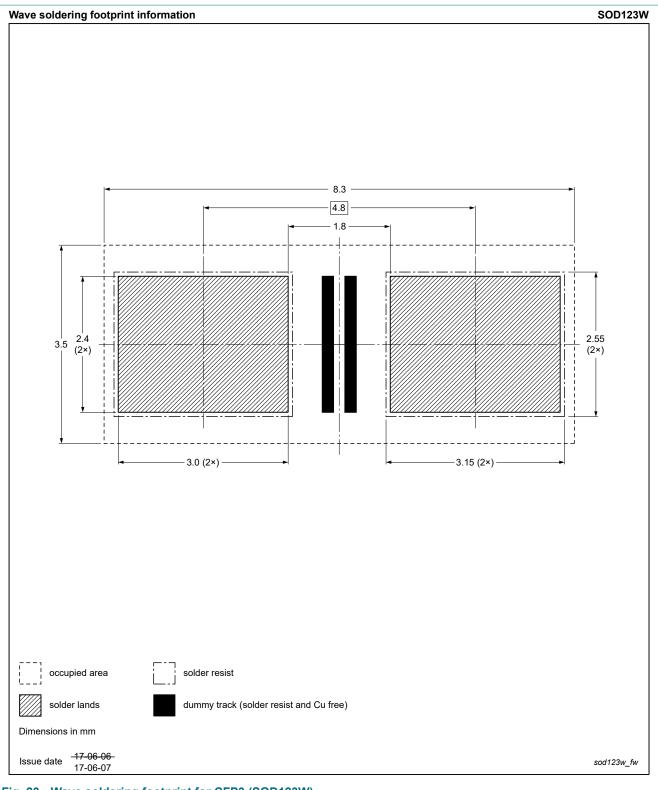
Wave soldering footprint for CFP3 (SOD123W)
